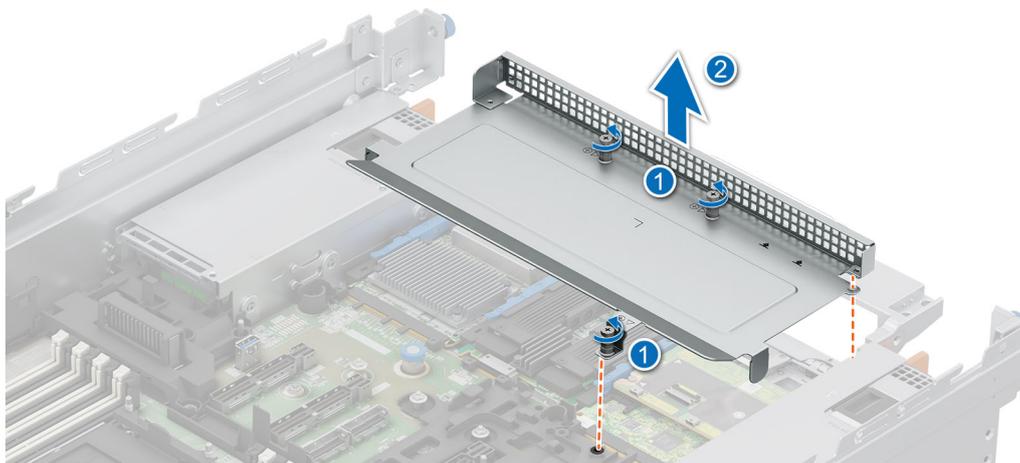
Removing the expansion card riser 4 and riser 2 blank
